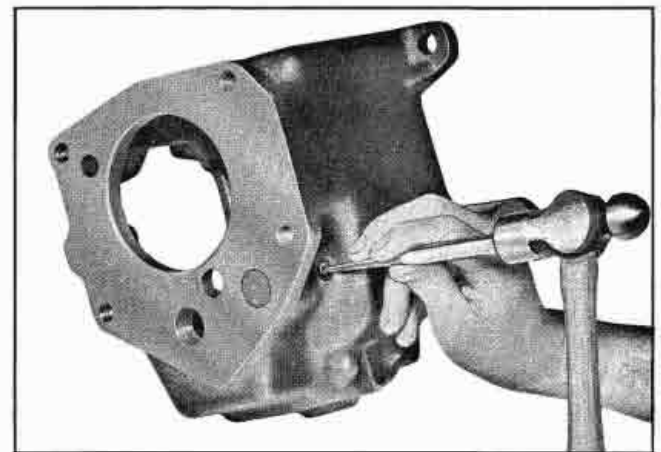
Driving Reverse Idler Shaft Lock Pin Into Shaft
